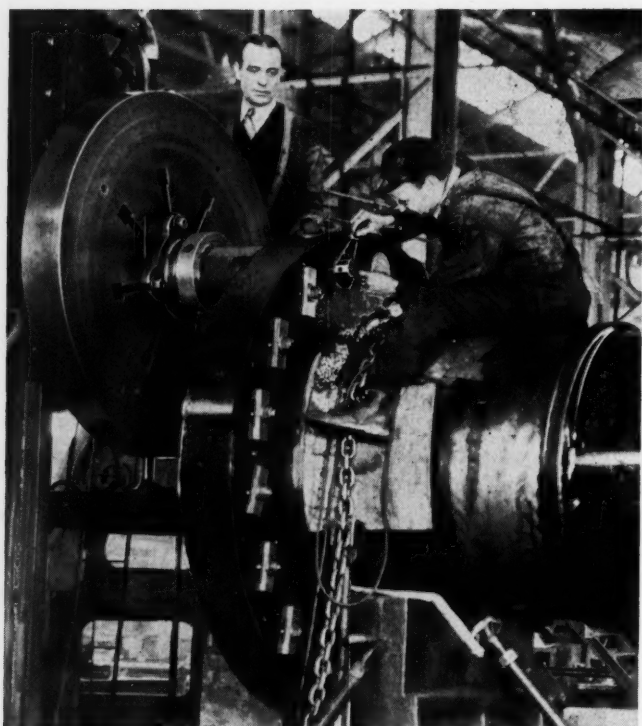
Drilling and boring the bolt hole in the flange of a large hydraulic turbine shaft. No play is permissible between the mating members; the holes must be bored and reamed to close limits for size and center distance.
